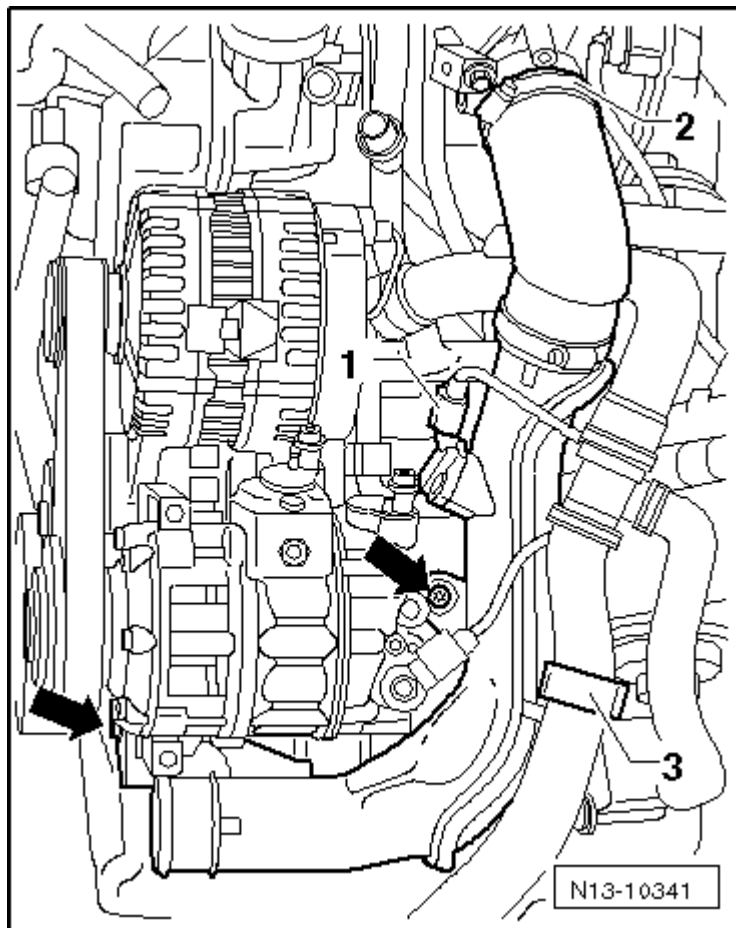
Identifying Clamp To Open To Free Up Charge Air Pipe -3-
